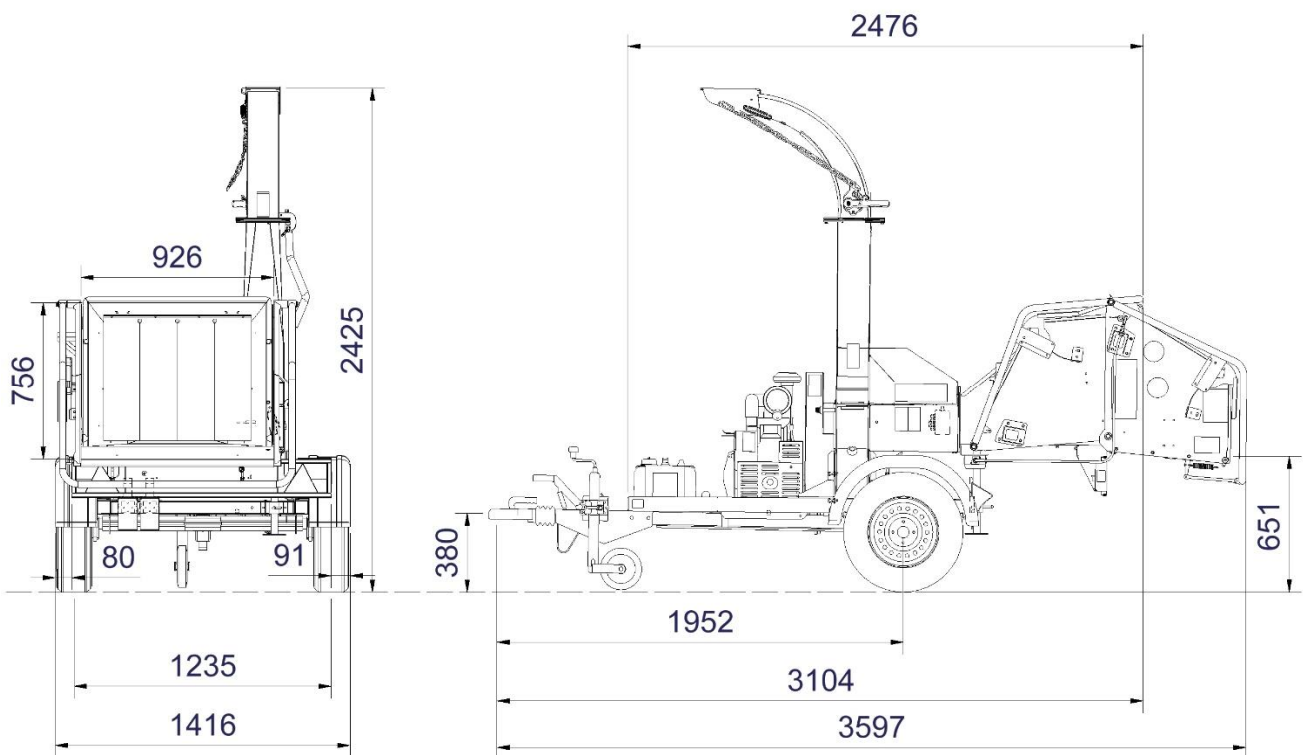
Dimensional drawing for TP 130 MOBILE with foldable funnel
